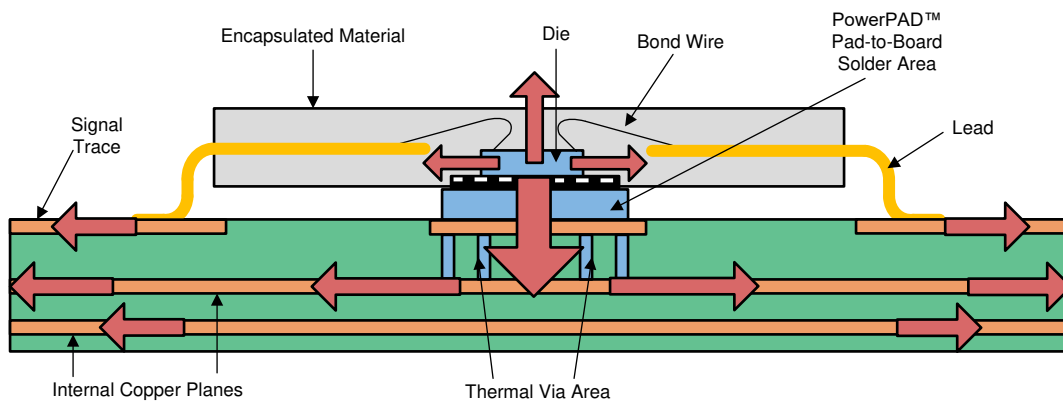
Cross Section of Thermal Pad™ Package Mounted to PCB and Resulting Heat Transfer
